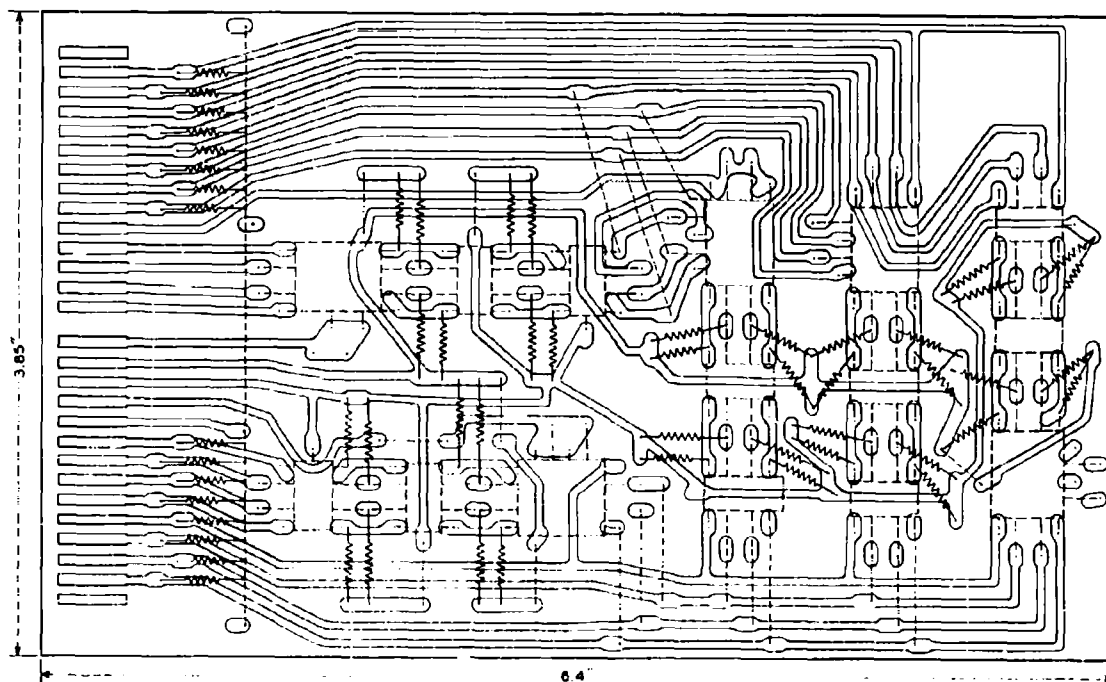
Layout plan of 4 bit register on printed-wire board using ceramic packages.
